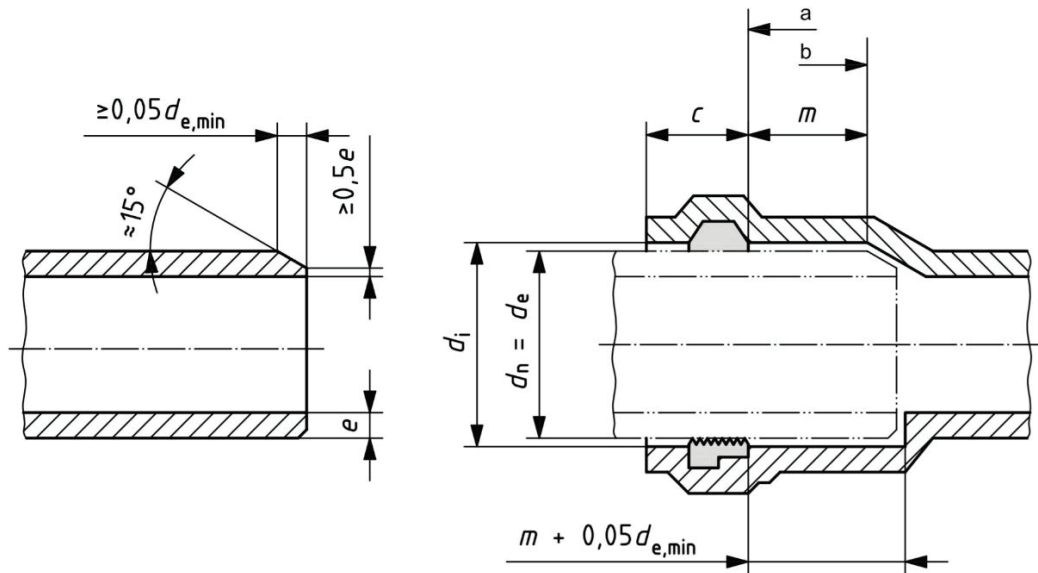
Dimensions of socket & spigot end for pipe with rubber ring
